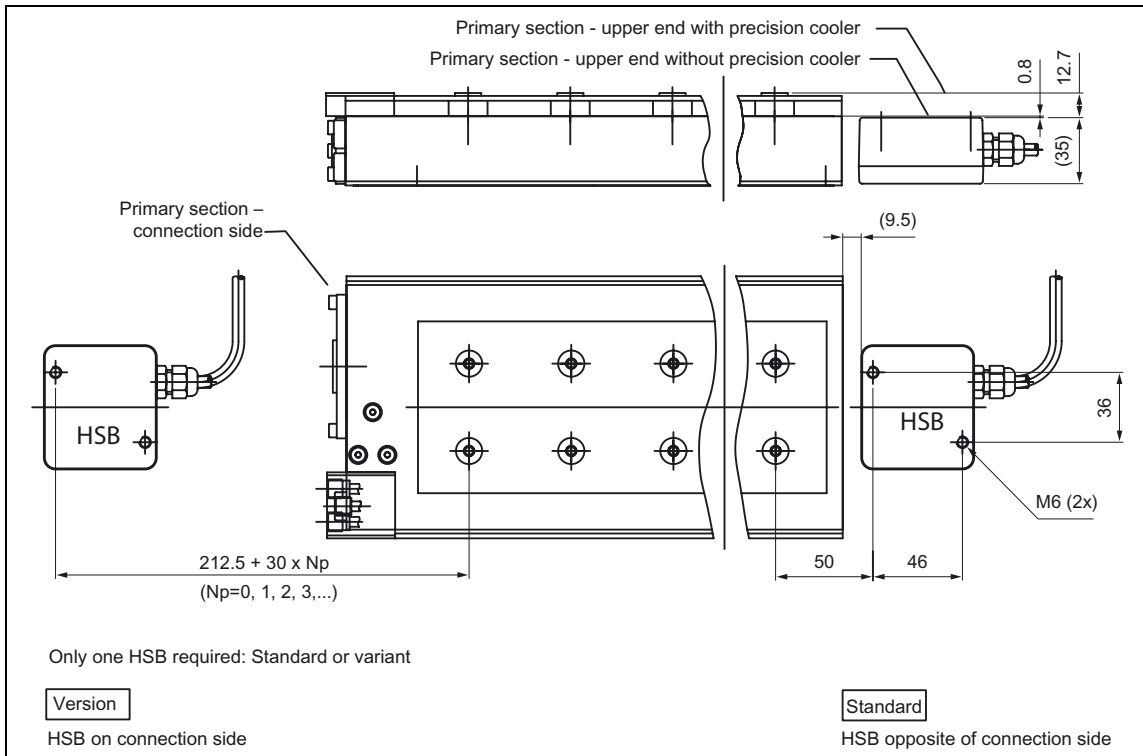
Hall sensor box (HSB) with straight cable outlet for the 1FN3050, 1FN3100, and 1FN3150 motor models
